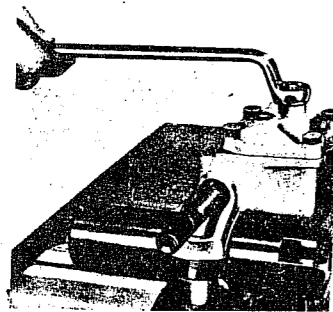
Releasing the locknut on the roller and worm play adjusting screw.
